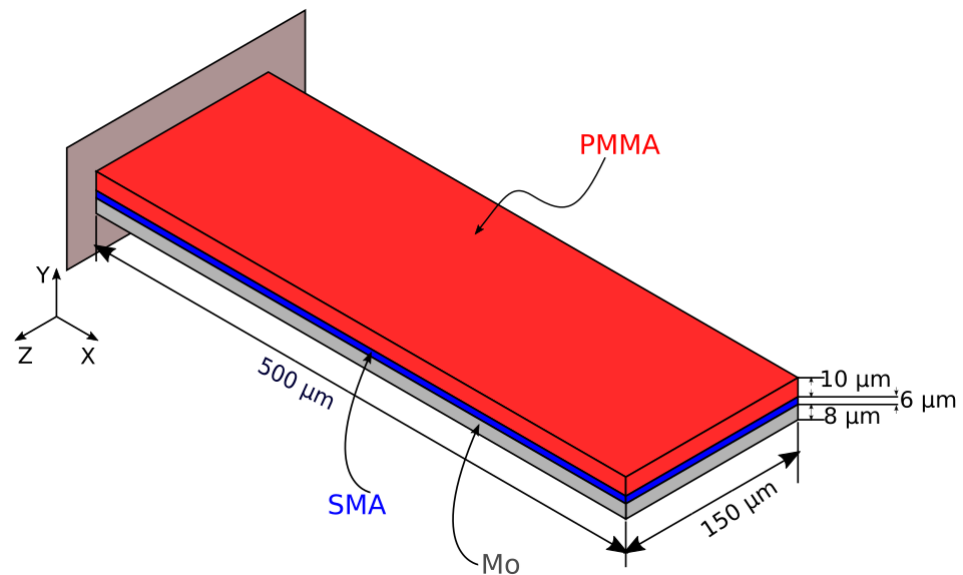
Dimensions of the actuator assembly, which is clamped at the left side. The red layer is polymer, blue is SMA and gray is molybdenum.
